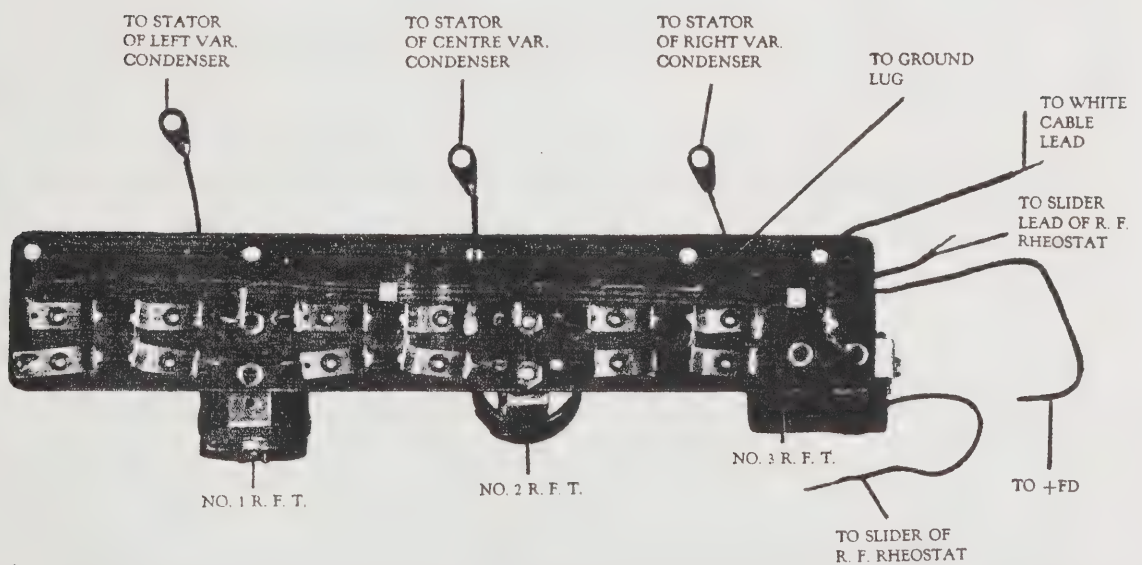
VIEW OF R.F. AMPLIFIER ASSEMBLY IN MODELS 30 (Later Type), 35 AND 48, SHOWING WHERE EACH LEAD IS TO BE CONNECTED.
